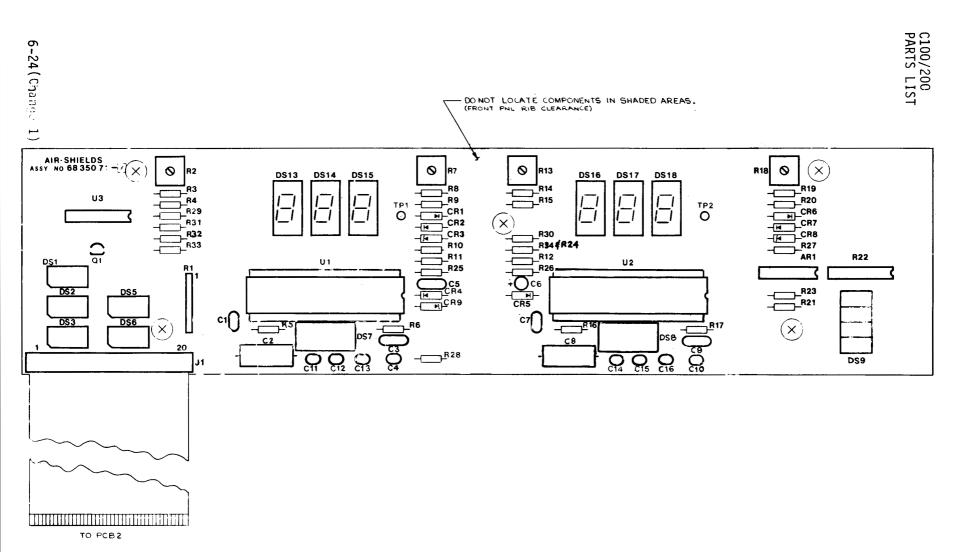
PARTS LOCATION DIAGRAM, DISPLAY BOARD PCB1 - MODEL C68 CONTROLLER
